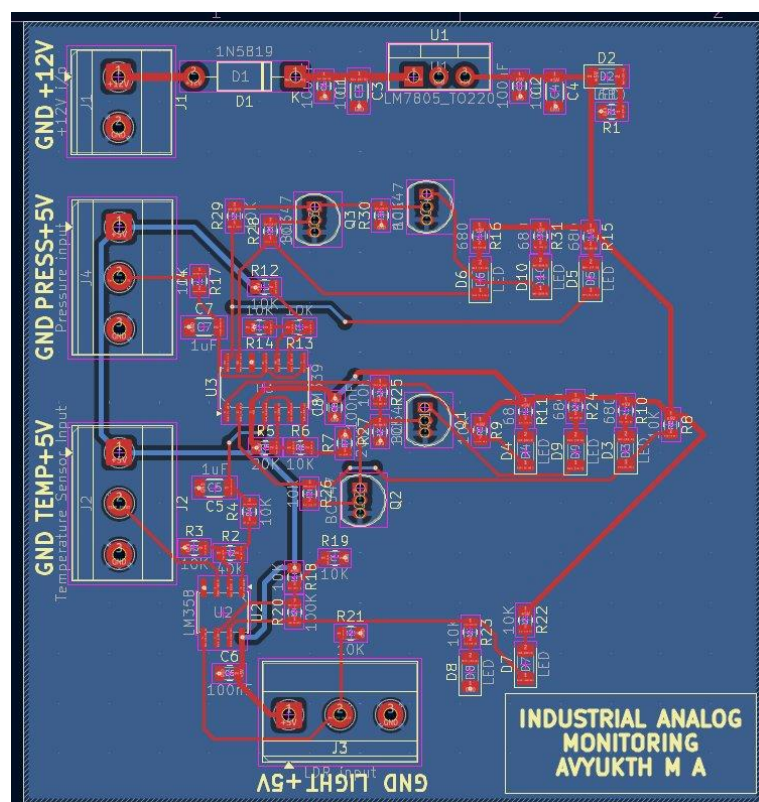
PCB Layout showing front copper (red), back ground plane (blue), and silkscreen
